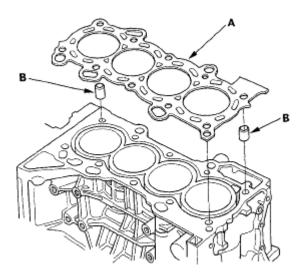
Installing Cylinder Head Gasket And Dowel Pins On Engine Block Courtesy of AMERICAN HONDA MOTOR CO., INC.
